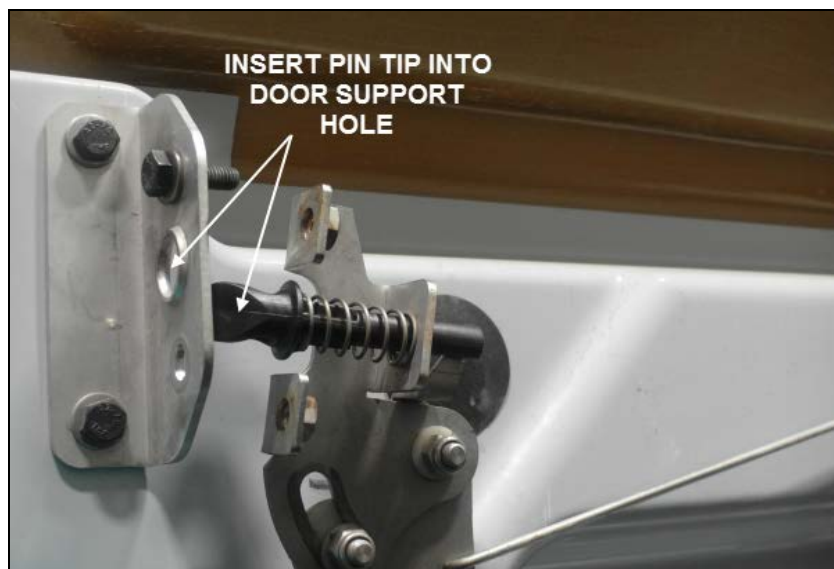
LATCH MECH. INTO DOOR SUPPORT
